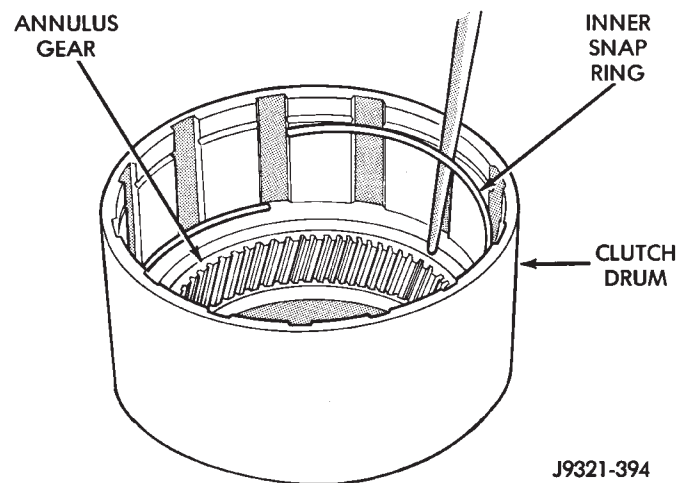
Clutch Drum Inner Retaining Ring Installation
